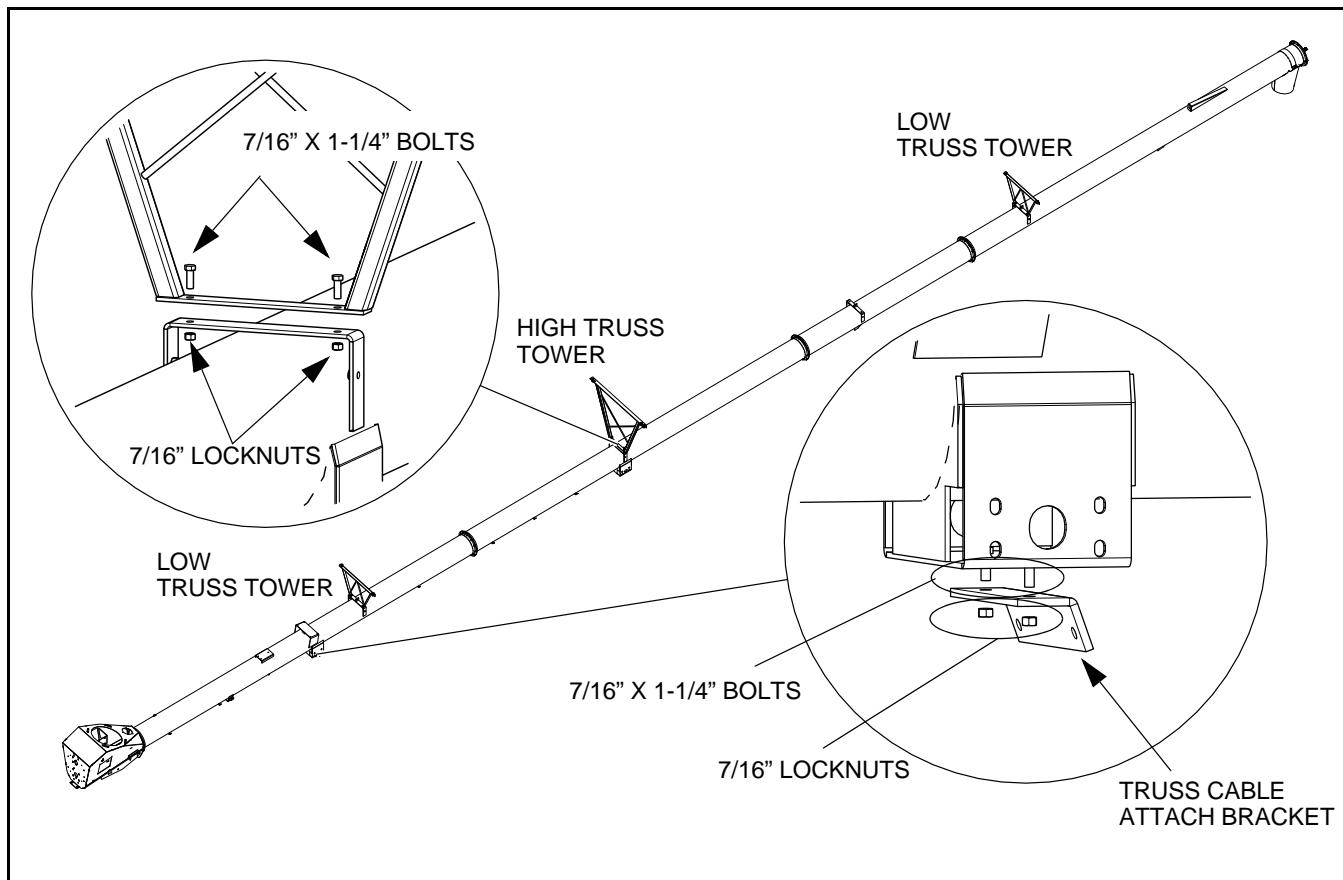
X130-74 Truss Towers and Truss Cable Attach Brackets
